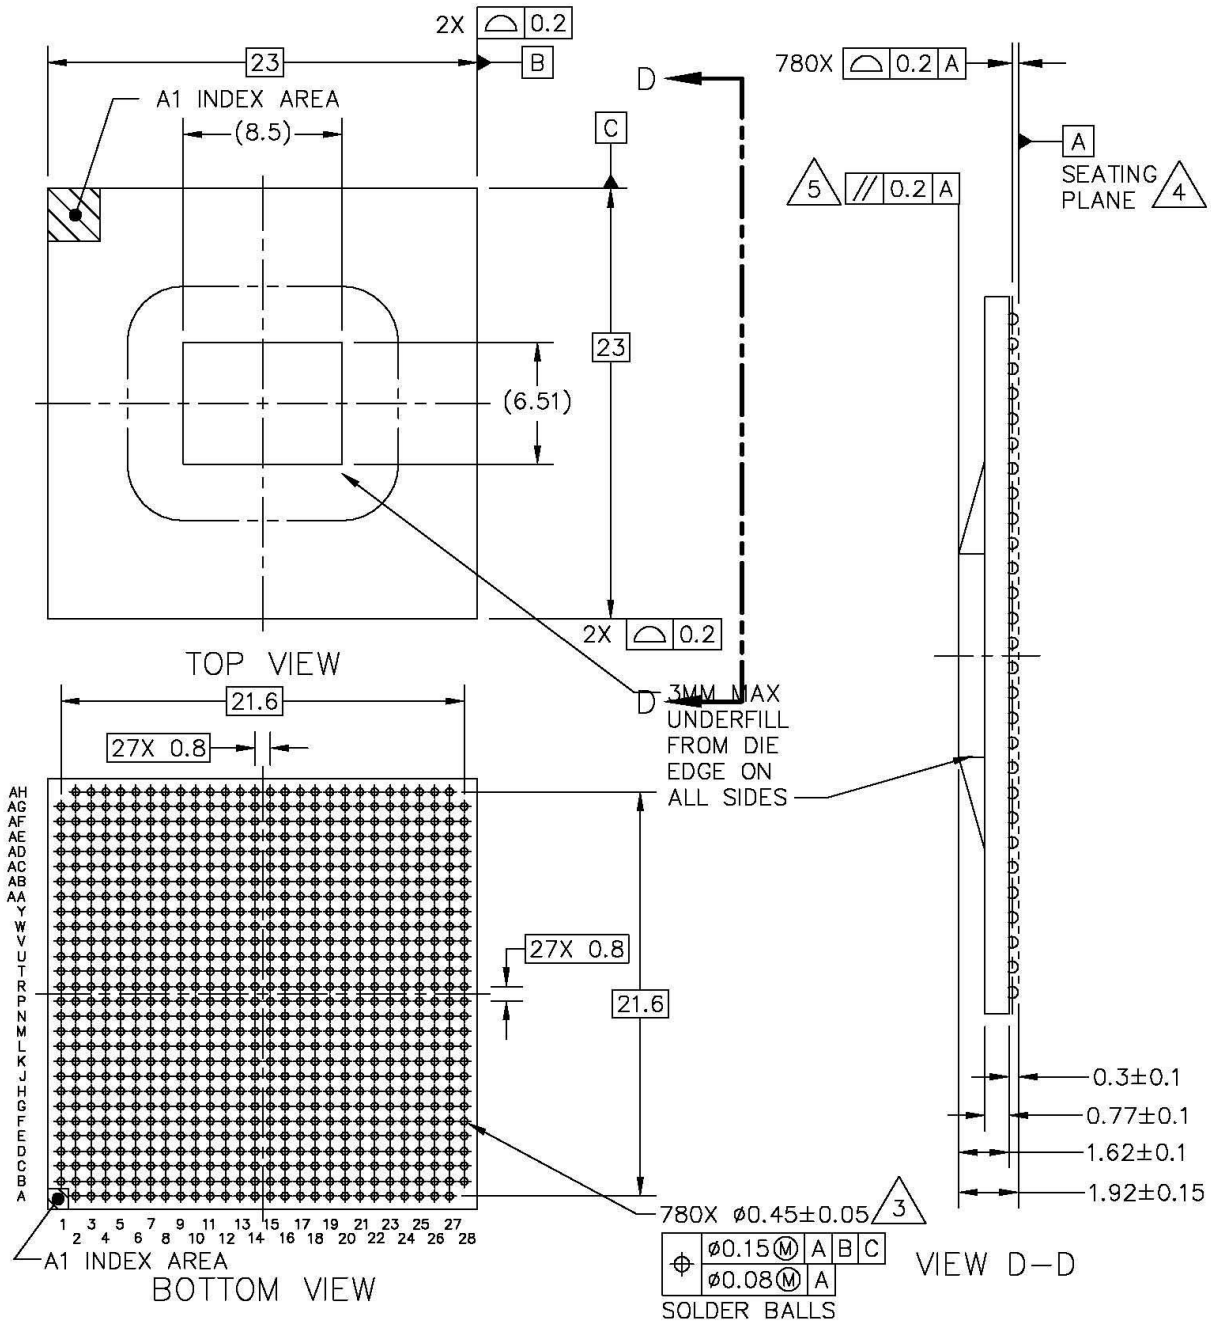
Mechanical dimensions of the FC-PBGA 23x23 mm (780 balls)
